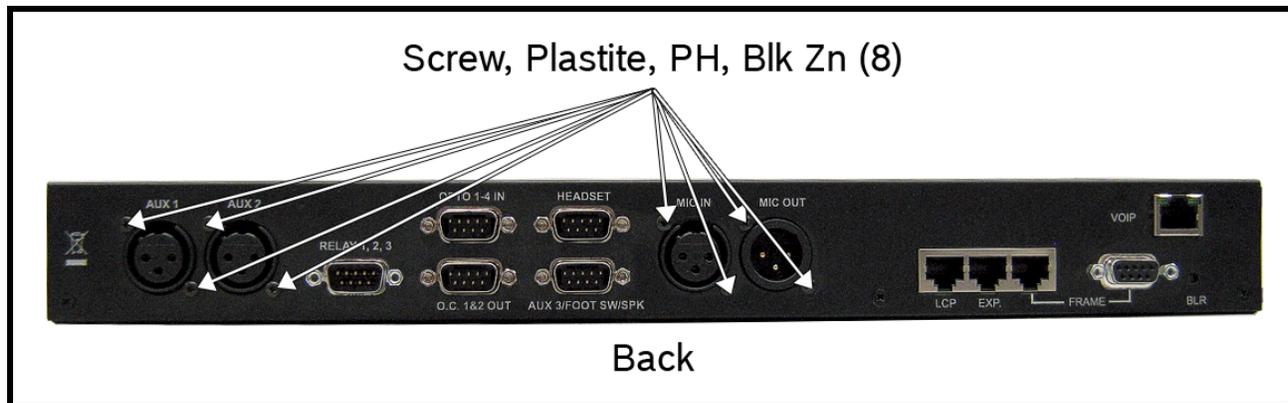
GPIO Expansion Unit — XLR Connector Screws
